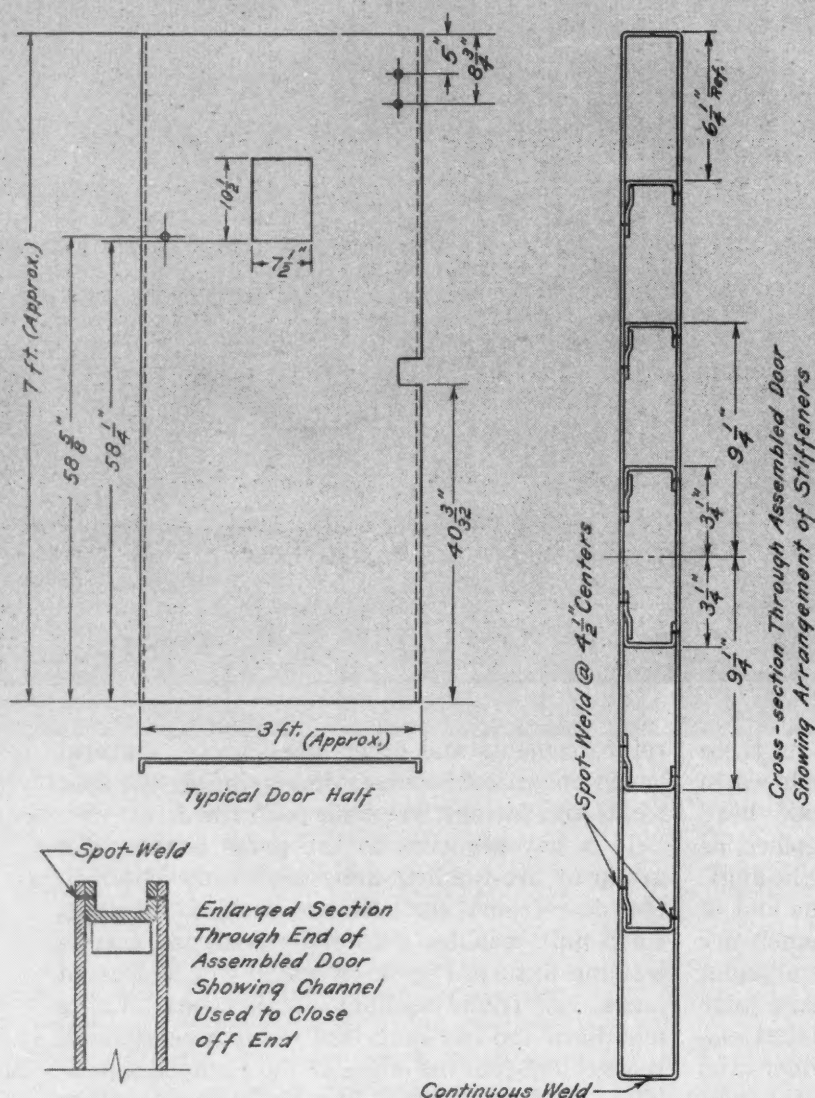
Cross-sectional diagram of a hollow metal door, showing the engagement of stiffening channels in one section with clips in the other. Adjacent edges along the side are welded together
